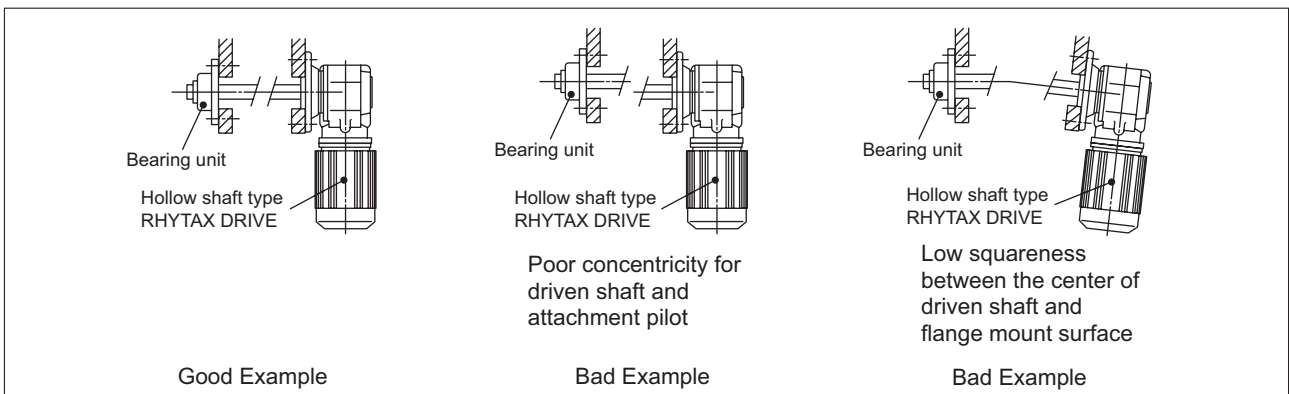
Attachment Example of Flange Mount (Overhead view of KHYM-72-K1)
